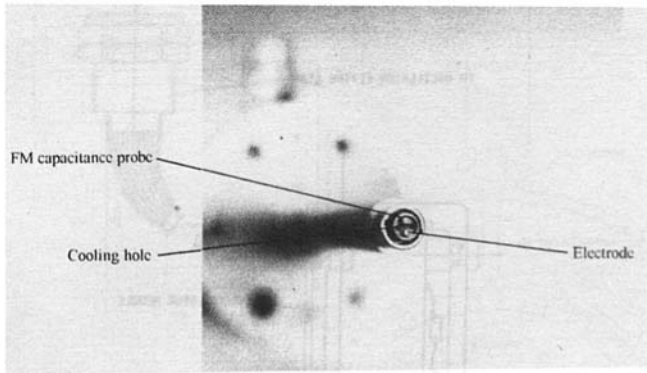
A close-up view of a probe tip, with electrode (bottom), FM capacitance probe (top), and cooling holes (left and right)
